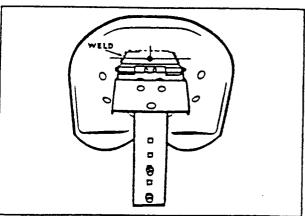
FITTING HINGED SEAT ASSEMBLY
